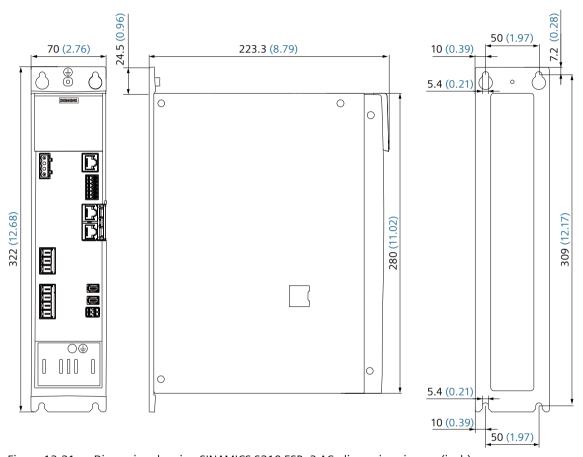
Dimension drawing SINAMICS S210 FSB, 3 AC, dimensions in mm (inch)
